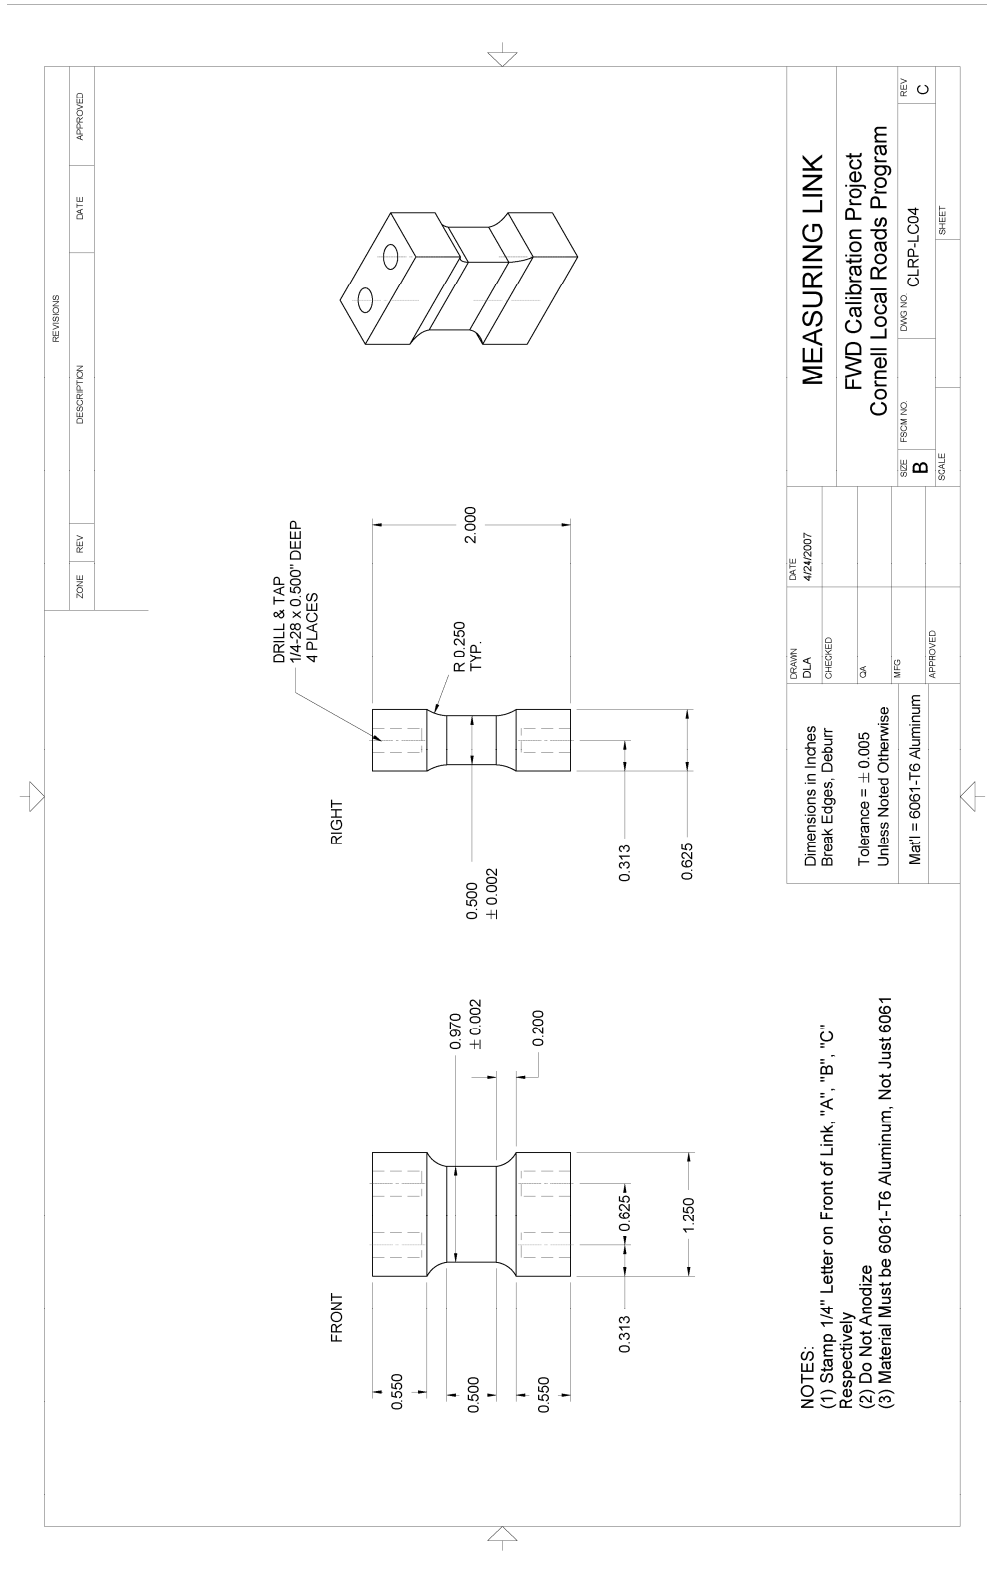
Drawing. CLRP-LC04 Measuring Link.
